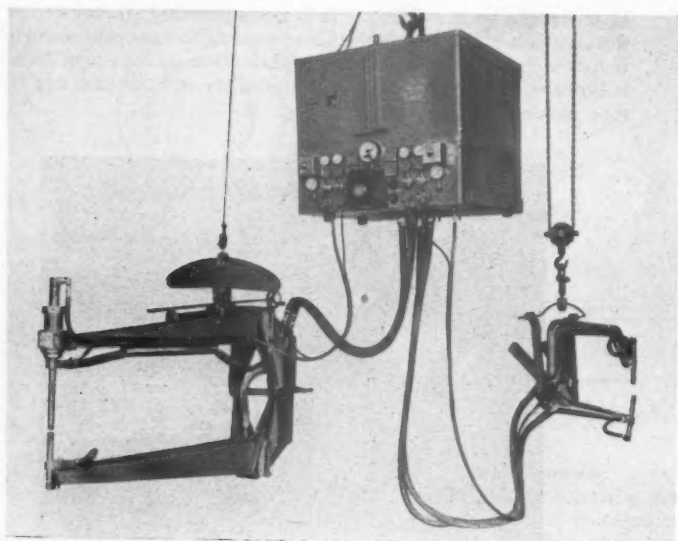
General purpose portable spot welding machine as used in automobile industry (Sciaky Electric Welding Machines Ltd.).
